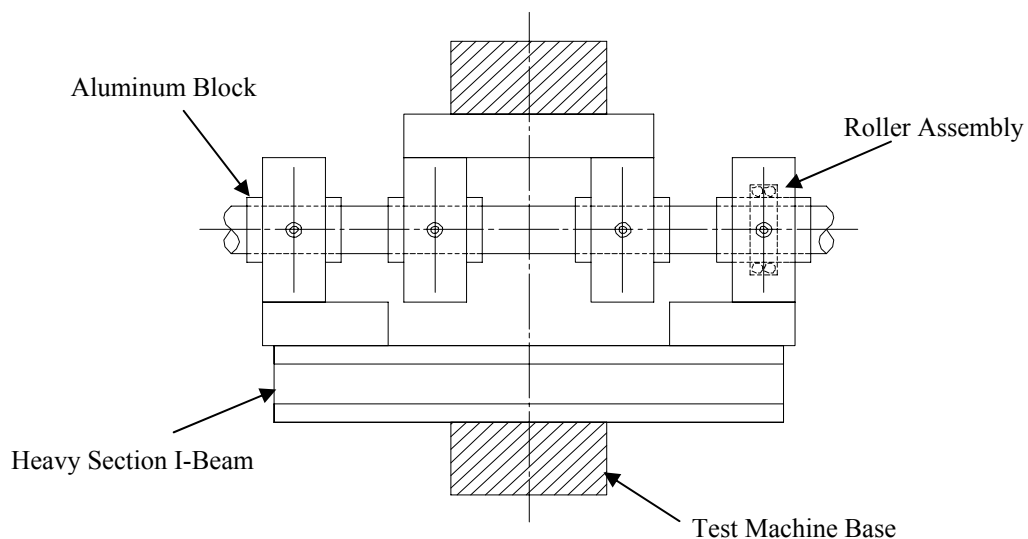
Loading fixture used in the surface-cracked pipe experiments
